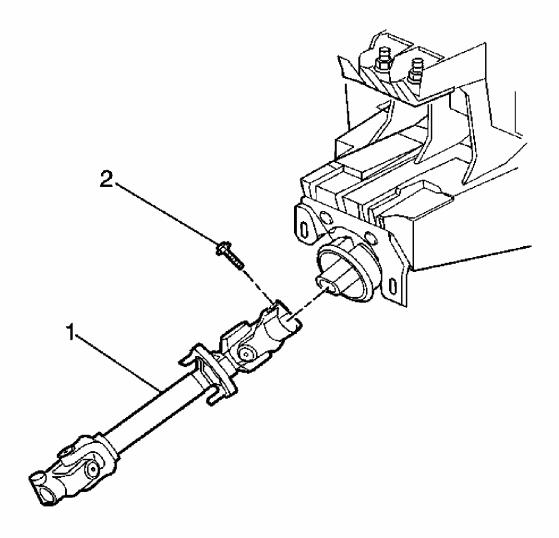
Removing/Installing Intermediate Steering Shaft Courtesy of GENERAL MOTORS CORP.
